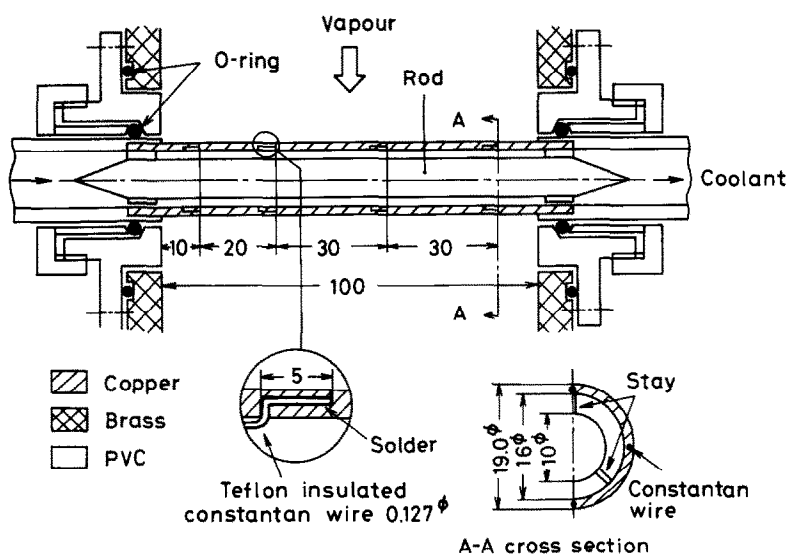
Details of 19-mm-O.D. tube attached to test section.
